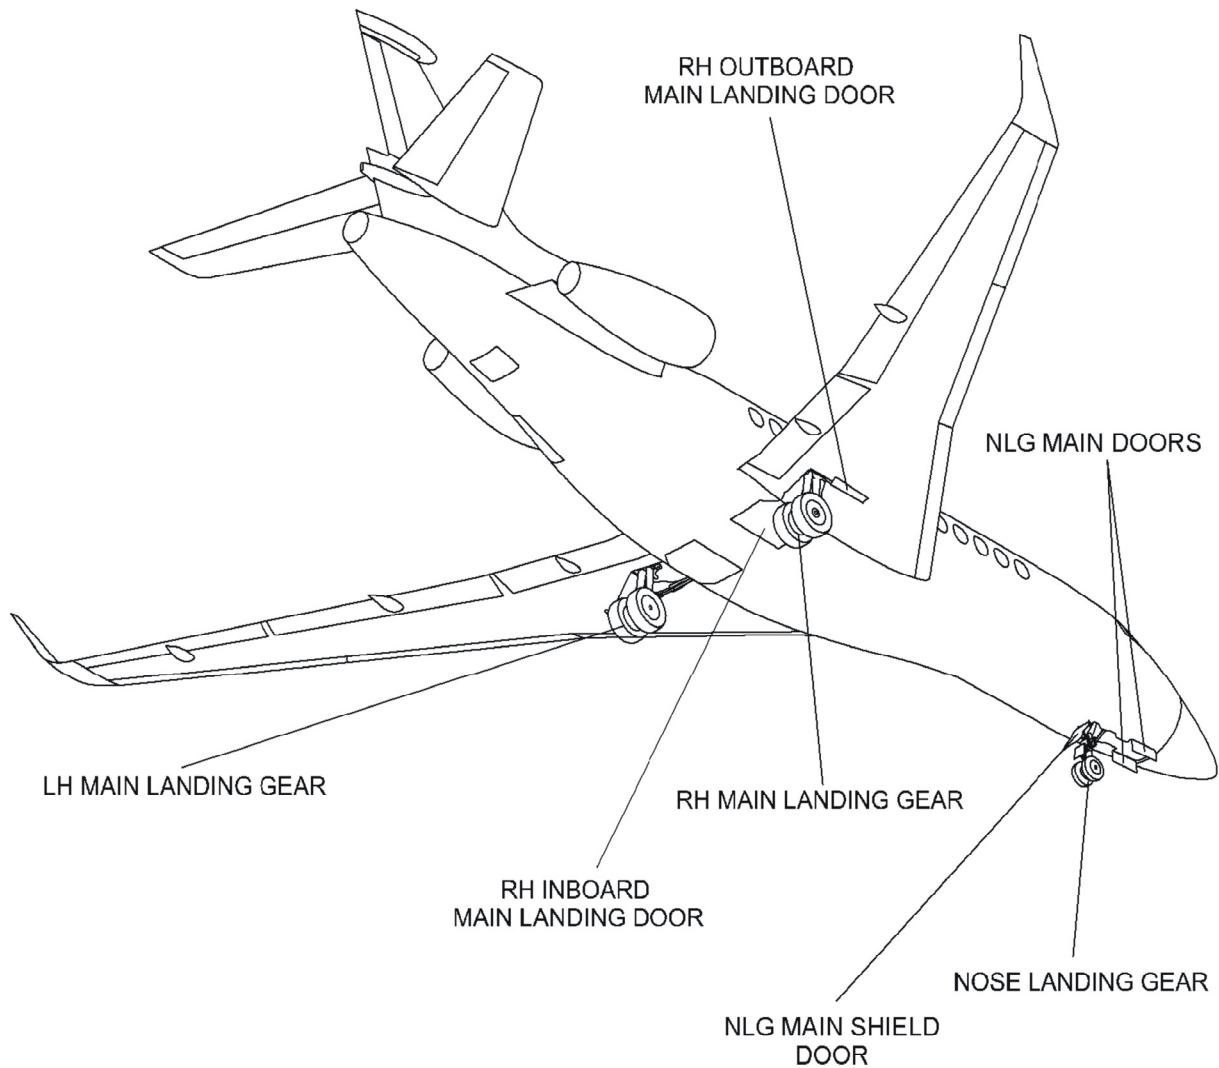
1-05-00 LANDING GEARS PICTURE
